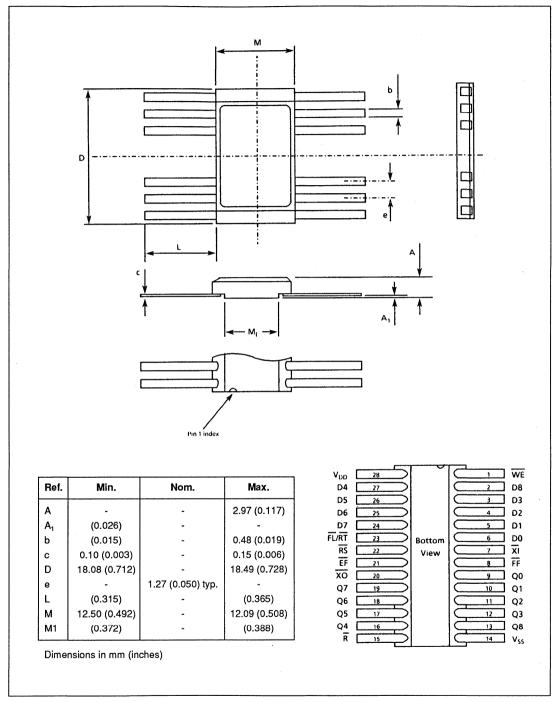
28 Lead Ceramic Flatpack (Solder Seal) - Package Style F
